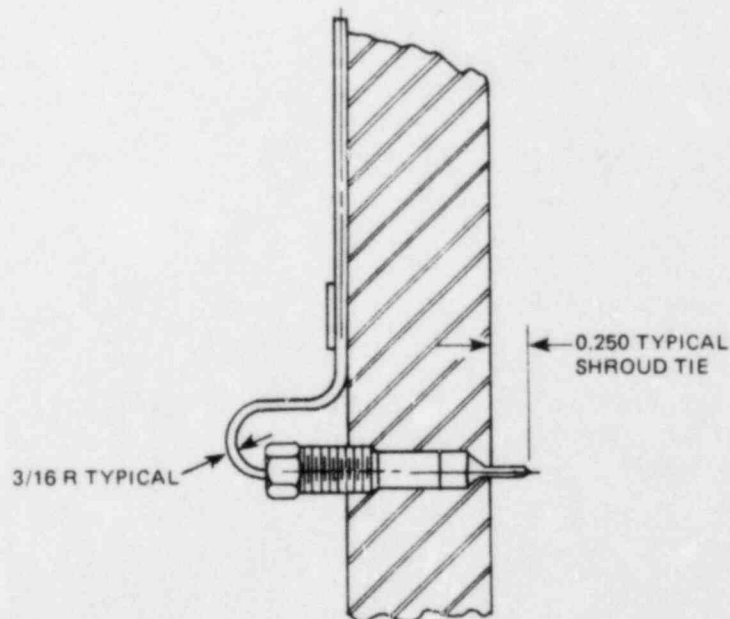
Typical installation of a shroud-box thermocouple. Dimensions are in inches (1 in. = 2.54 cm).
